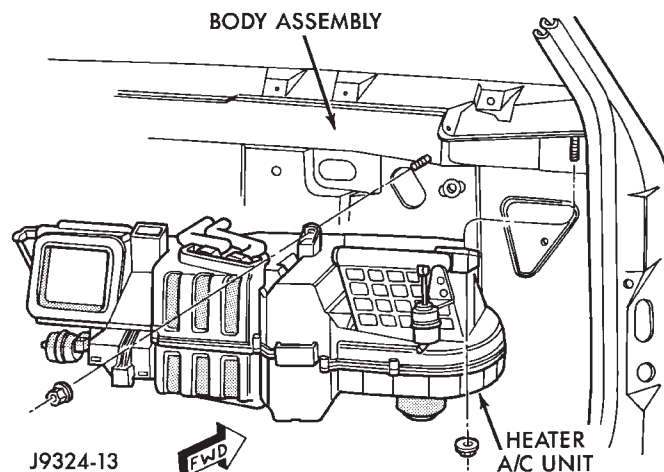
Heater-A/C Unit (Shown from Passenger Compartment)
